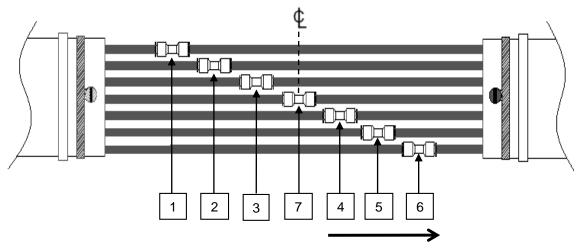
Couple Tubes 4, 5, and 6 to the Right of Center Tube 7 Coupling
